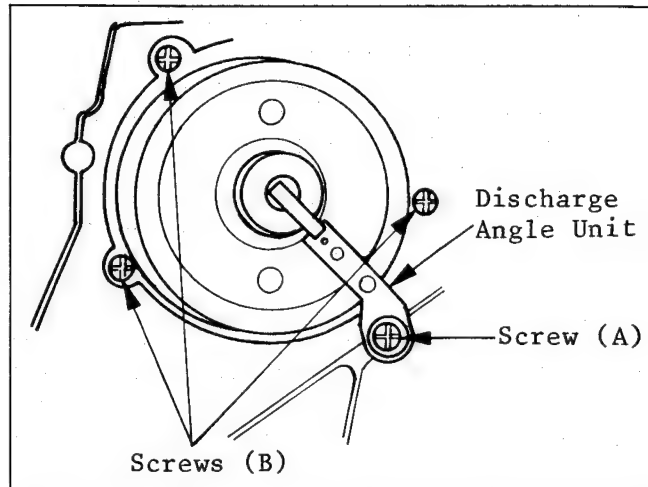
Replacement of D.D. Cylinder Unit-(1)
